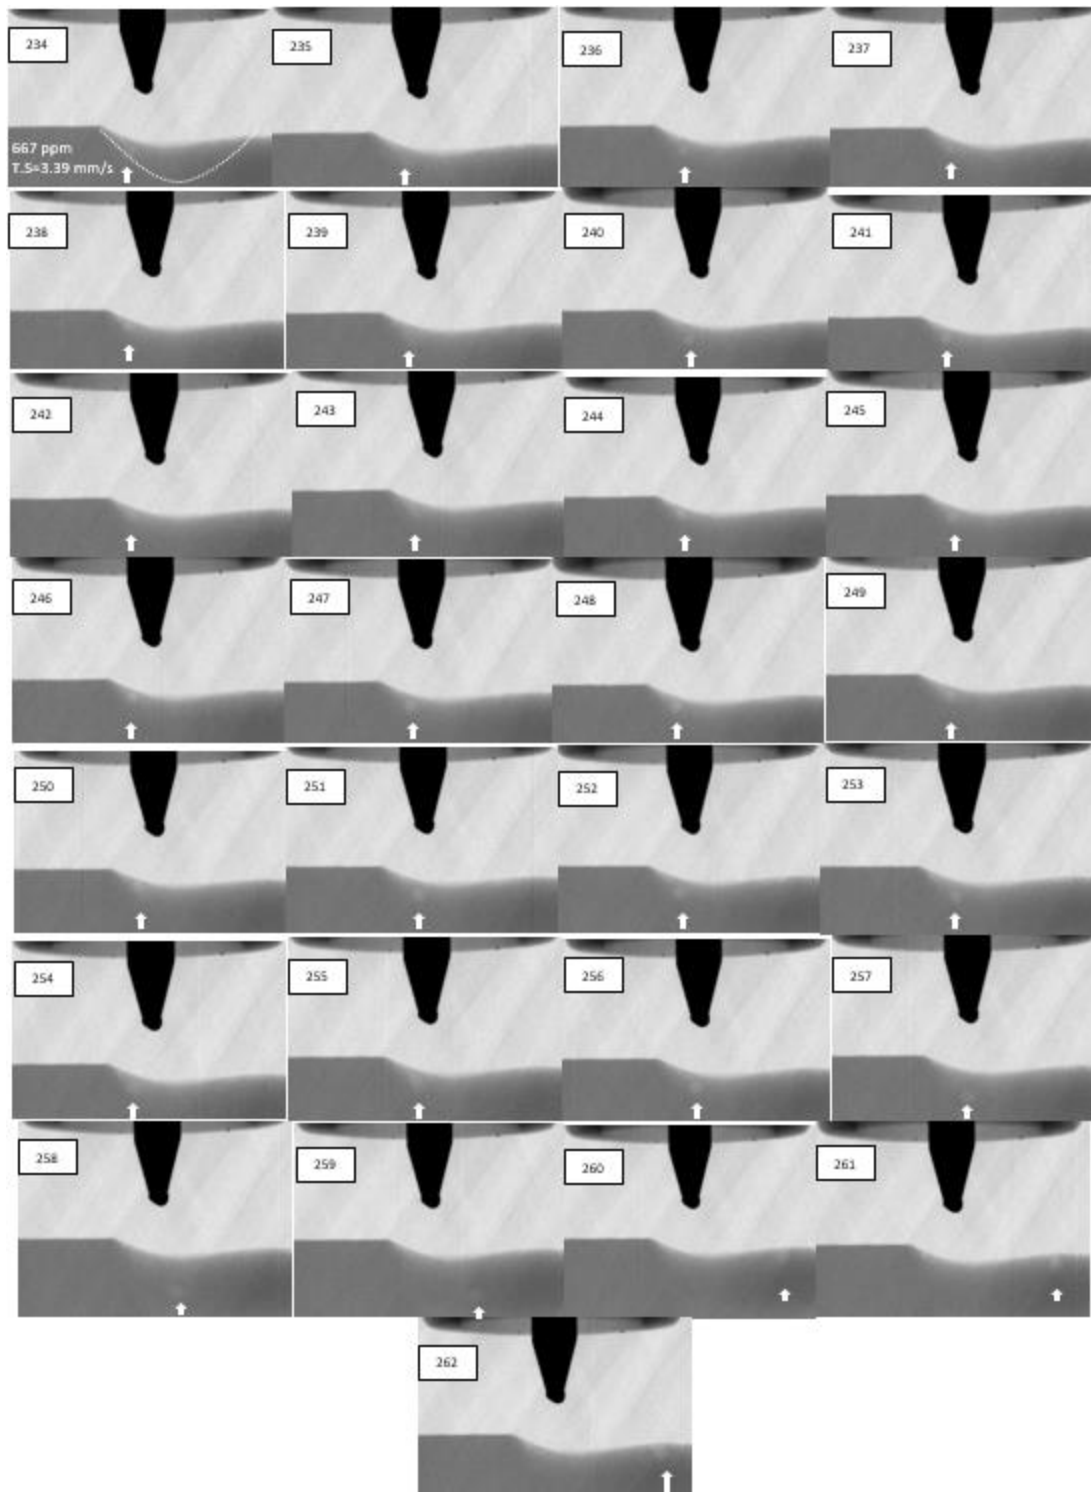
Alloy 6061 welded using 667 ppm of shielding gas hydrogen at 3.39 mm/s.
